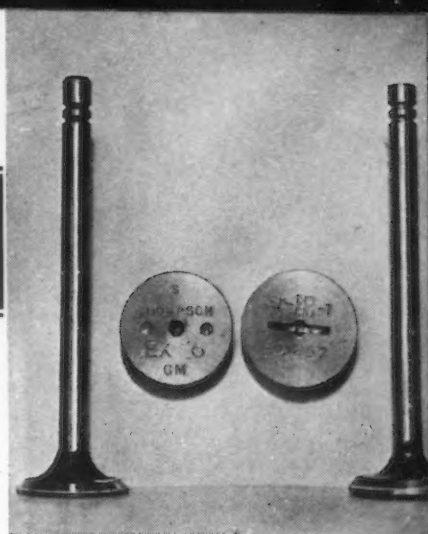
End of valve stems are grooved for holding the valve retainers, and the valve heads are drilled or slot milled to facilitate seat grinding.
